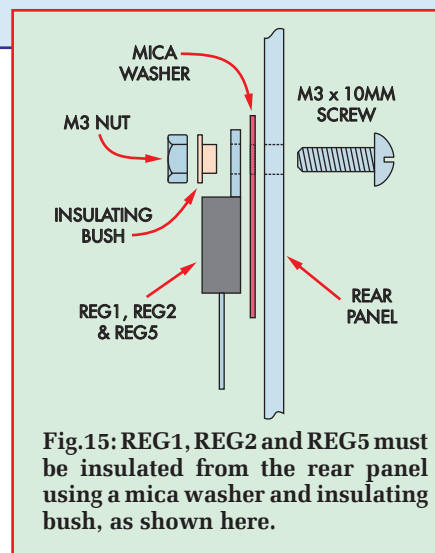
REG1, REG2 and REG5 must be insulated from the rear panel using a mica washer and insulating bush, as shown here.
